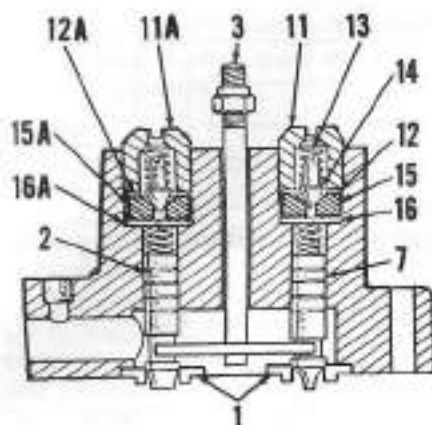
Cross-sectional view of pump valve assembly. Relief valve in pump control valve retainer (11) limits systems pressure, whereas relief valve in leak-off (ram cylinder return) valve retainer (11A) limits pressure in ram cylinder circuit due to shock loads imposed by implement on lift linkage
